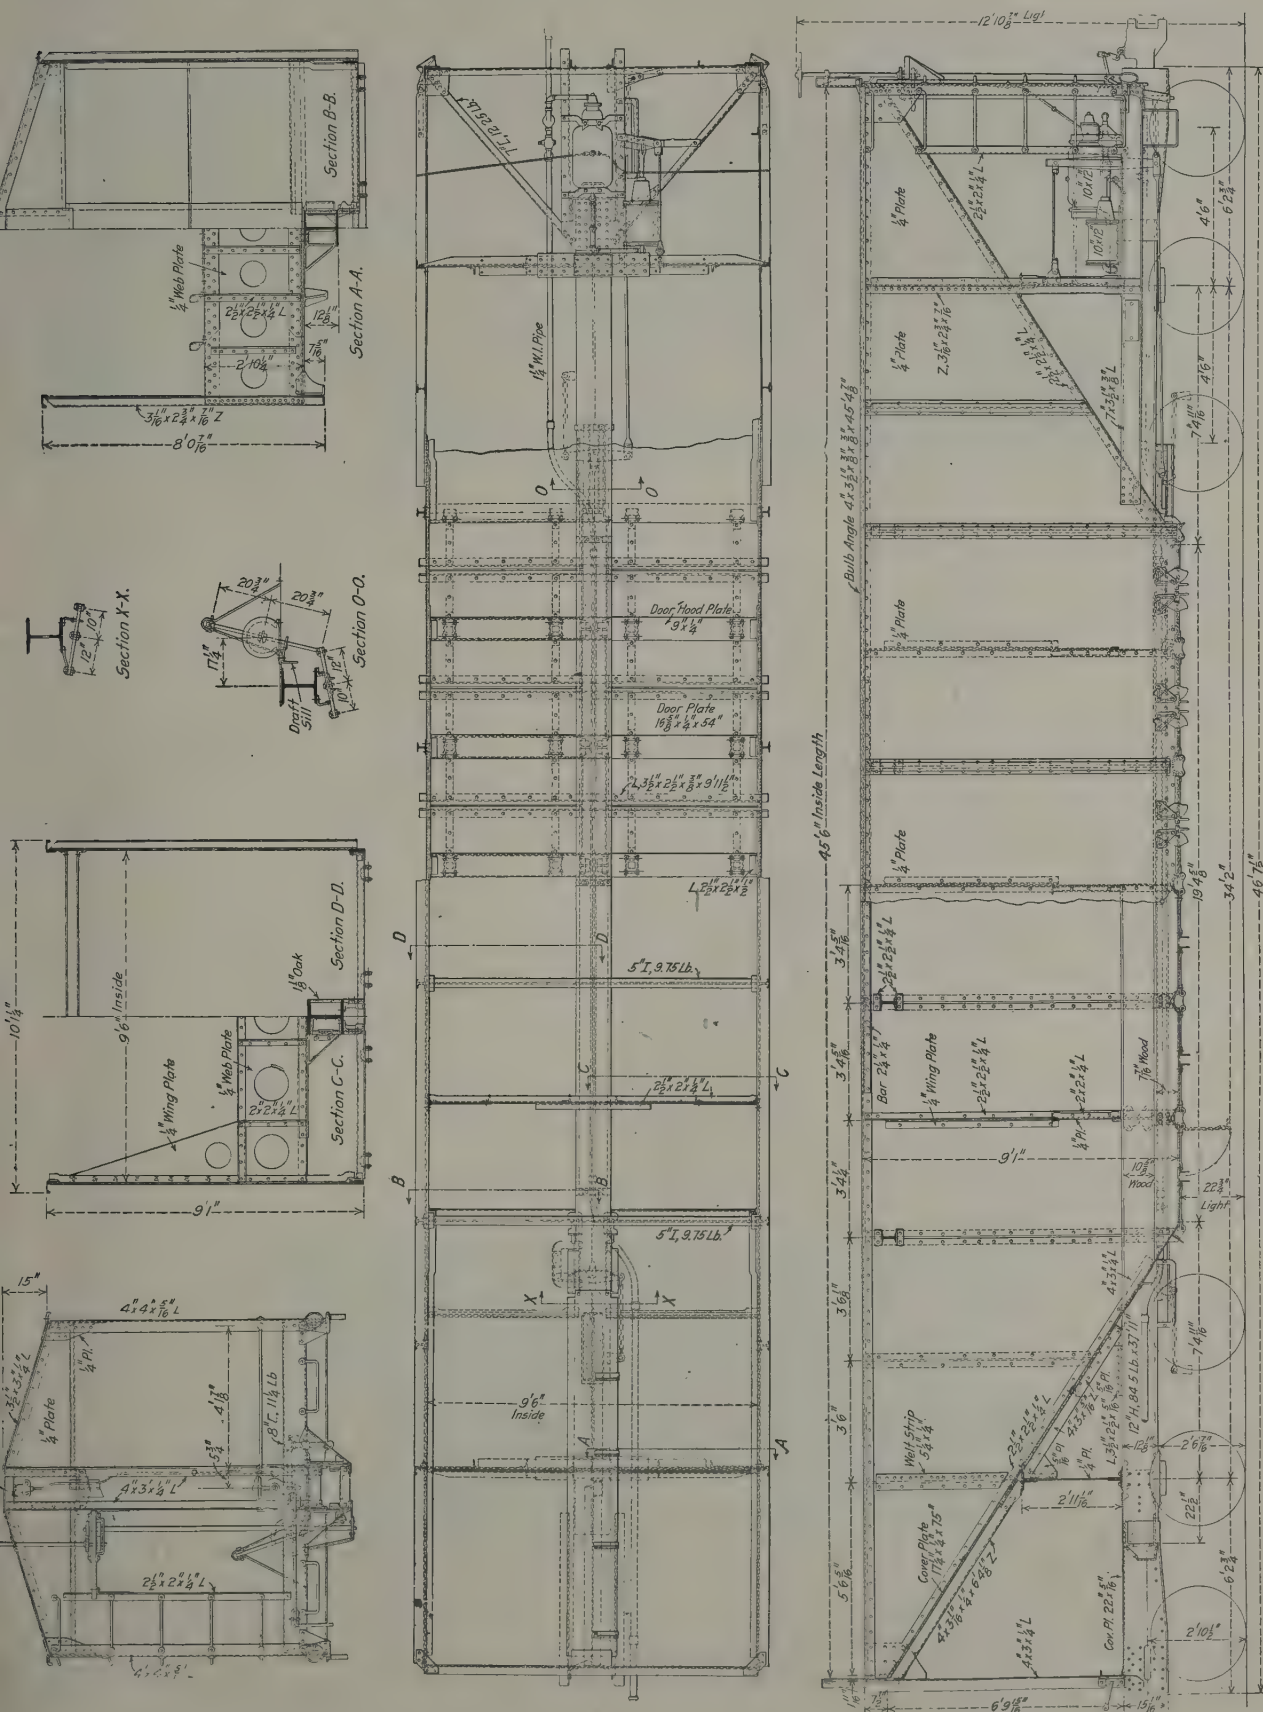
Plan, Elevation and Cross Sections, 100-Ton Hopper Car Shown in Figs. 47-49.
